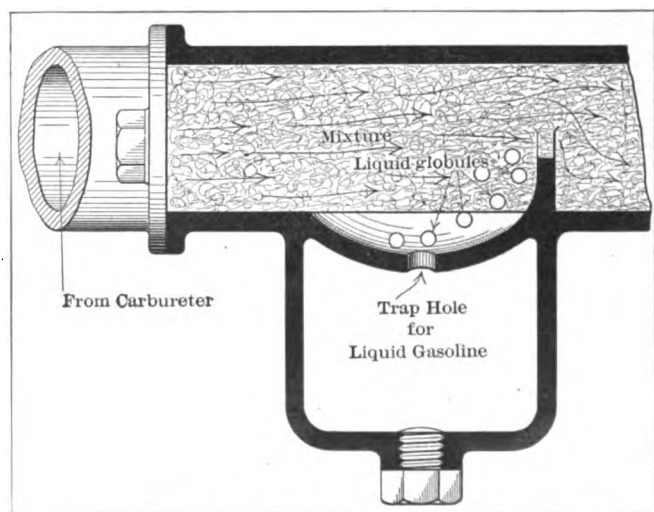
Trap in the manifold, designed to catch the liquid gasoline and hold it there until it vaporizes, when it will be released
